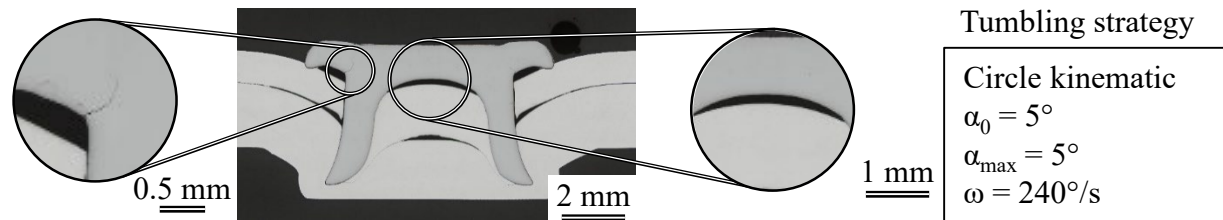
Macrograph with detail views of joint set with adapted tumbling strategy
